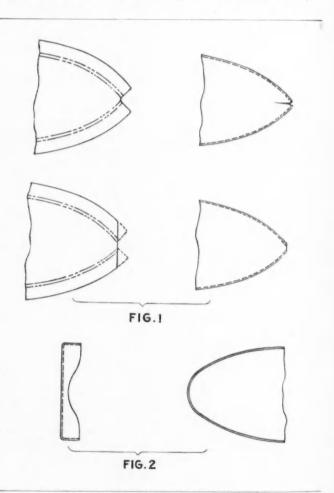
(Above) - Example of Cracking Caused by Insufficient Radius When Flanging Along Two Adjacent Sides (Below) - Manner in Which this Cracking Can Be Avoided
